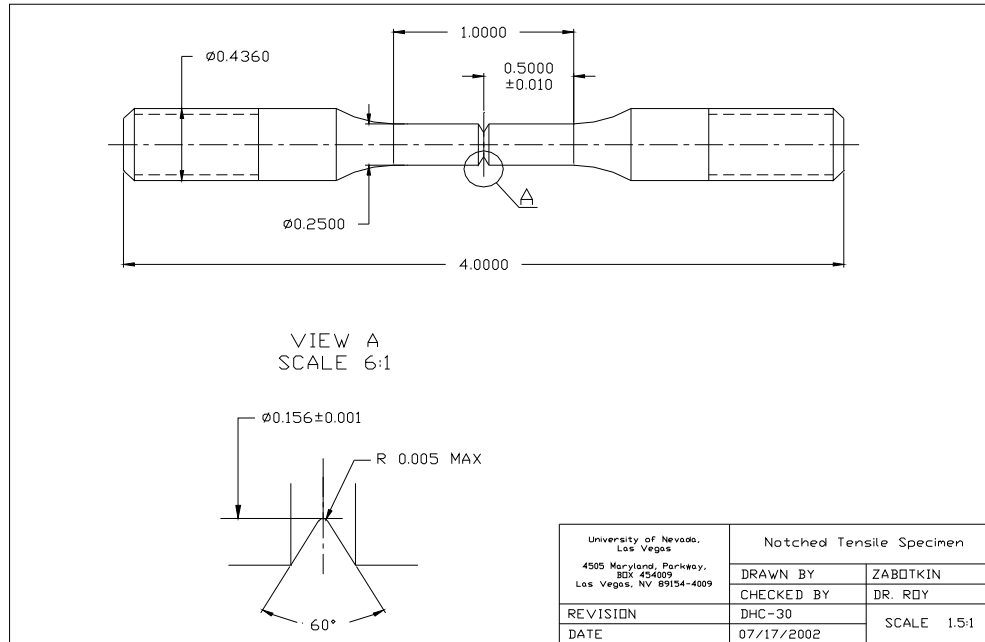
Dimensions of Notched Cylindrical Specimen
